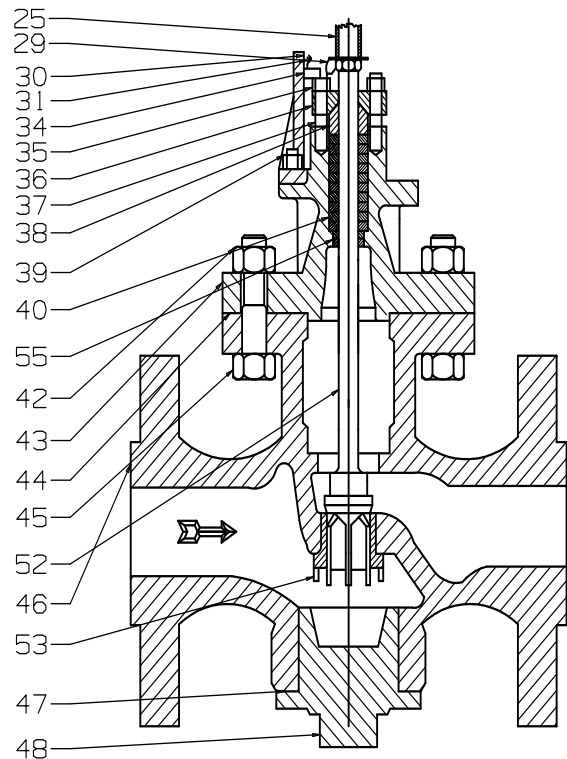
Single Ported Control Valve Body Assembly (Actuator Removed)
